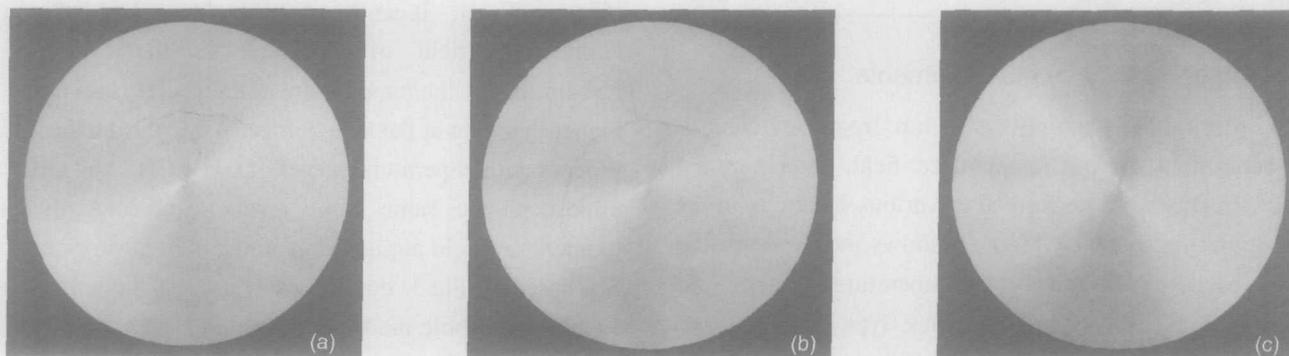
The cross section of DC and LFEC billets—(a), (b) DC billets; (c) LFEC billet
